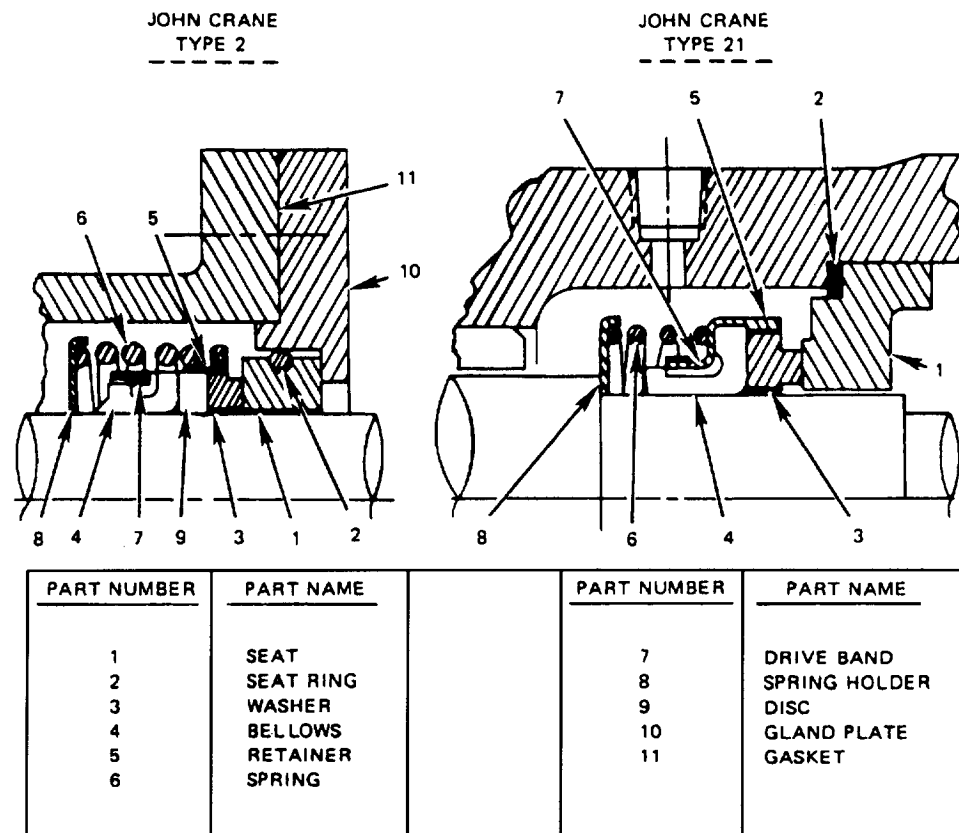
John Crane Types 2 and 21 Screw Pump Mechanical Shaft Seal with O-Ring Seal
